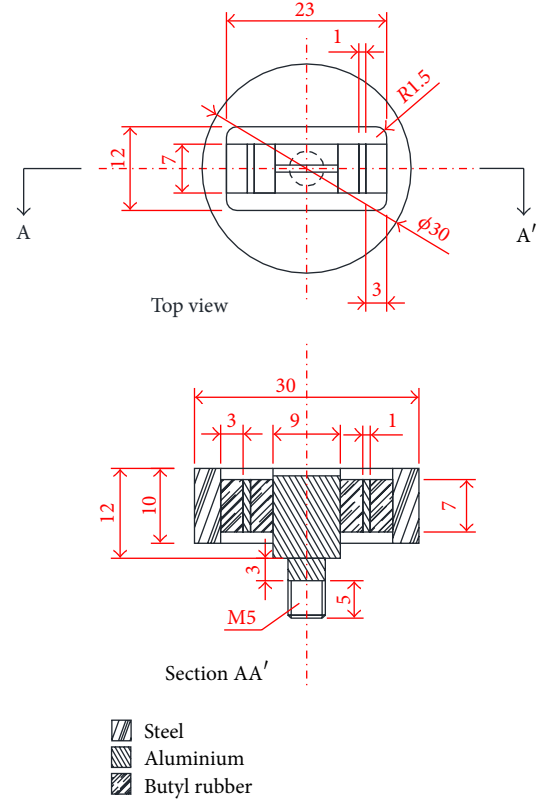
VDVN drawings (all dimensions are in millimeters).
